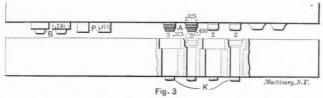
Punch and Die in which the Piece shown at A, Fig. 1, was formed. Fig. 3. Improved Punch and Die with Stepped Punches
